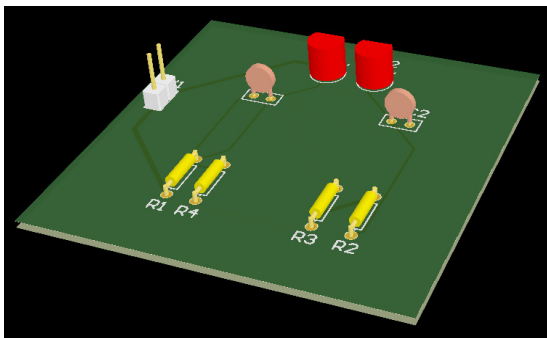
Multivibrator PCB, complete with component 3D bodies.
